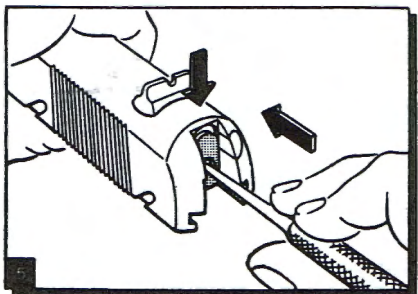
To remove firing pin (F) and spring (E), hold the slide in the left hand. With a 1/8 inch punch, push in the end of the firing pin; at the same time, push down on the firing pin retainer plate (DD). After firing pin and spring have been removed, pry out extractor (D)
